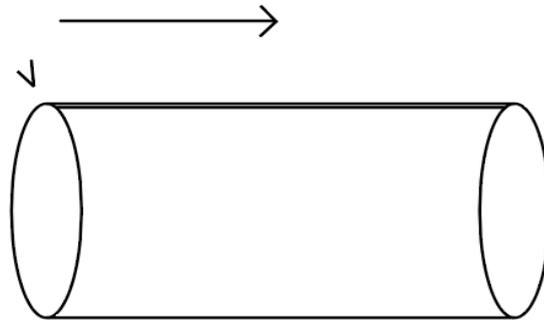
Welding takes place in the longitudinal direction i.e., lengthwise.
